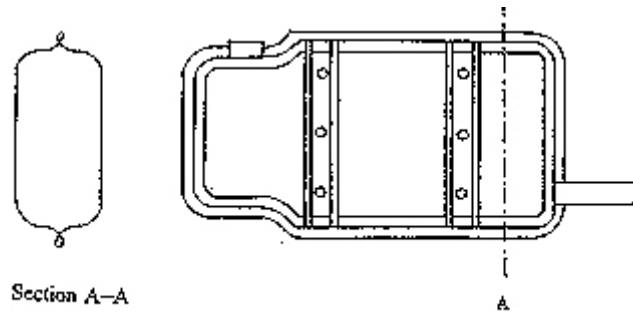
Bore holes at 6 welded point on muffler
